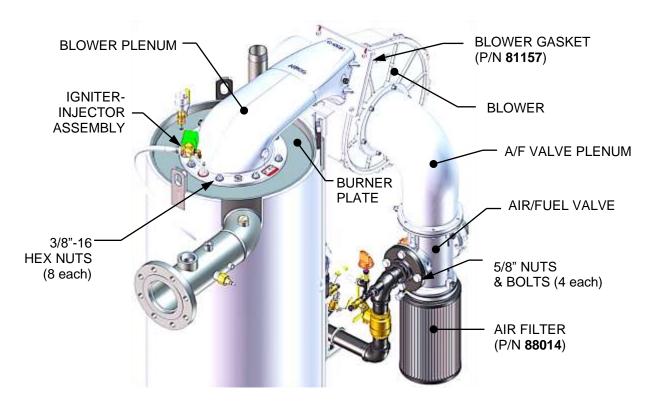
Burner Assembly Mounting Details - BMK2500 - 5000N
